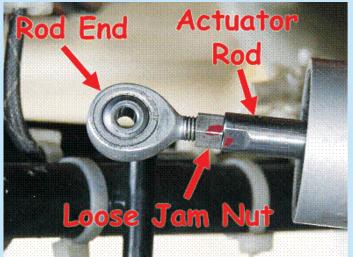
Nose Gear Hydraulic Actuator, Rod End, and Jam Nut
